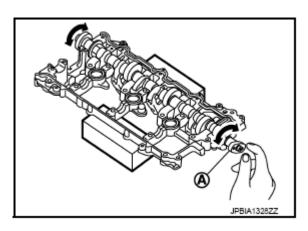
Checking Control Shaft Operation Courtesy of NISSAN NORTH AMERICA, INC.
